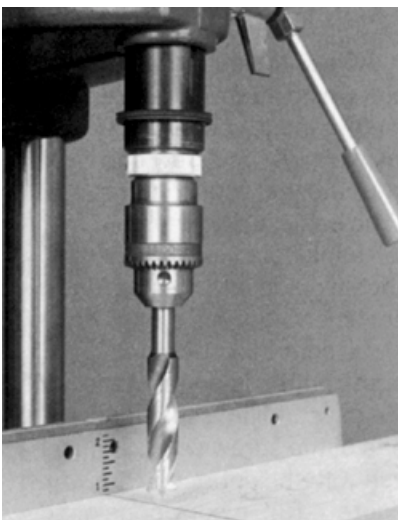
When drilling, use the rip fence to accurately position the holes. Make fine adjustments with the table height lever (Model 500) as shown or with the table adjustment crank (Model 510).
